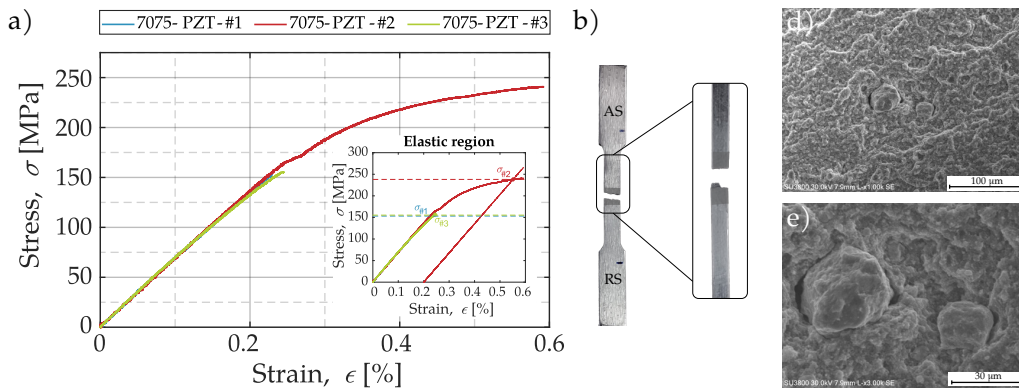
Uniaxial tensile tests of AA7075-PZT: engineering stress-strain curves (a); fractured AA7075-PZT-#1 sample (b); fractured surface of SSM (c, d)
